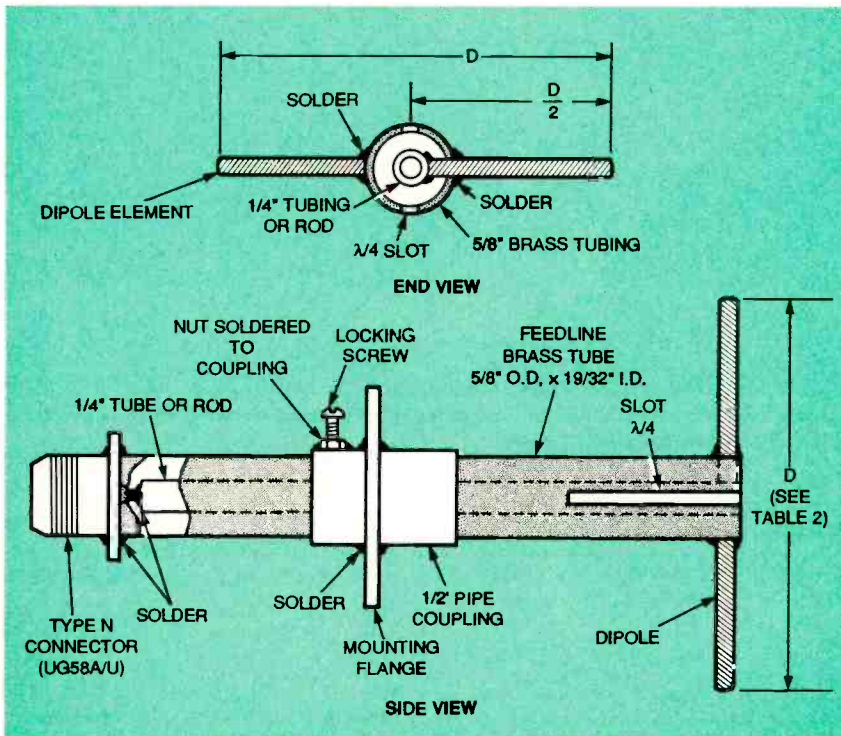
TWO VIEWS OF THE DIPOLE AND FEEDLINE construction details. In the end view drawing note that the right dipole element connects to the inner and outer tubes and shorts them together. The left dipole element connects just to the outside tube. The ends of both dipole elements are equi-distant from the center of the inner tube.
